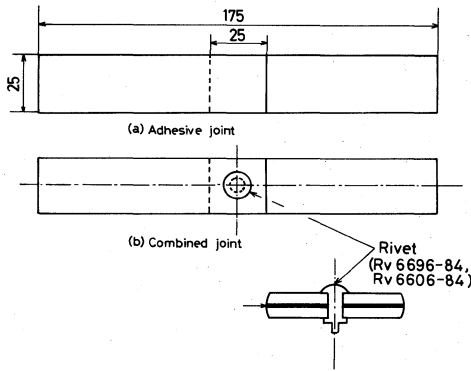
Shape and sizes of the adhesive and adhesive/rivet combined joints.
